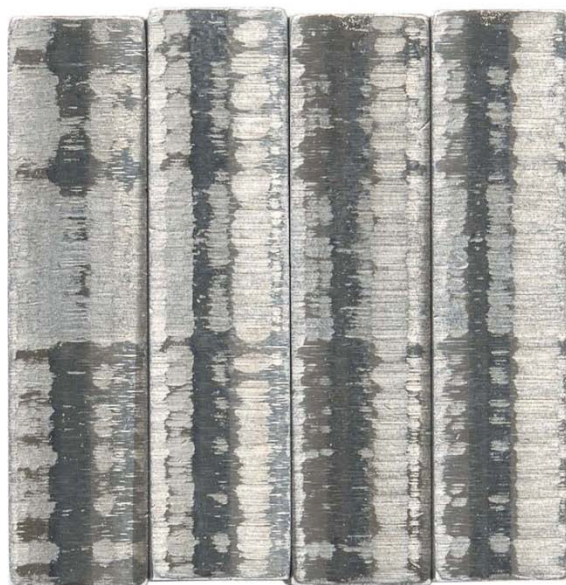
Pump SN: 16393229 Transfer Pump Blade Edges with 500-Hours Testing with ATJ/JP-8 Fuel
